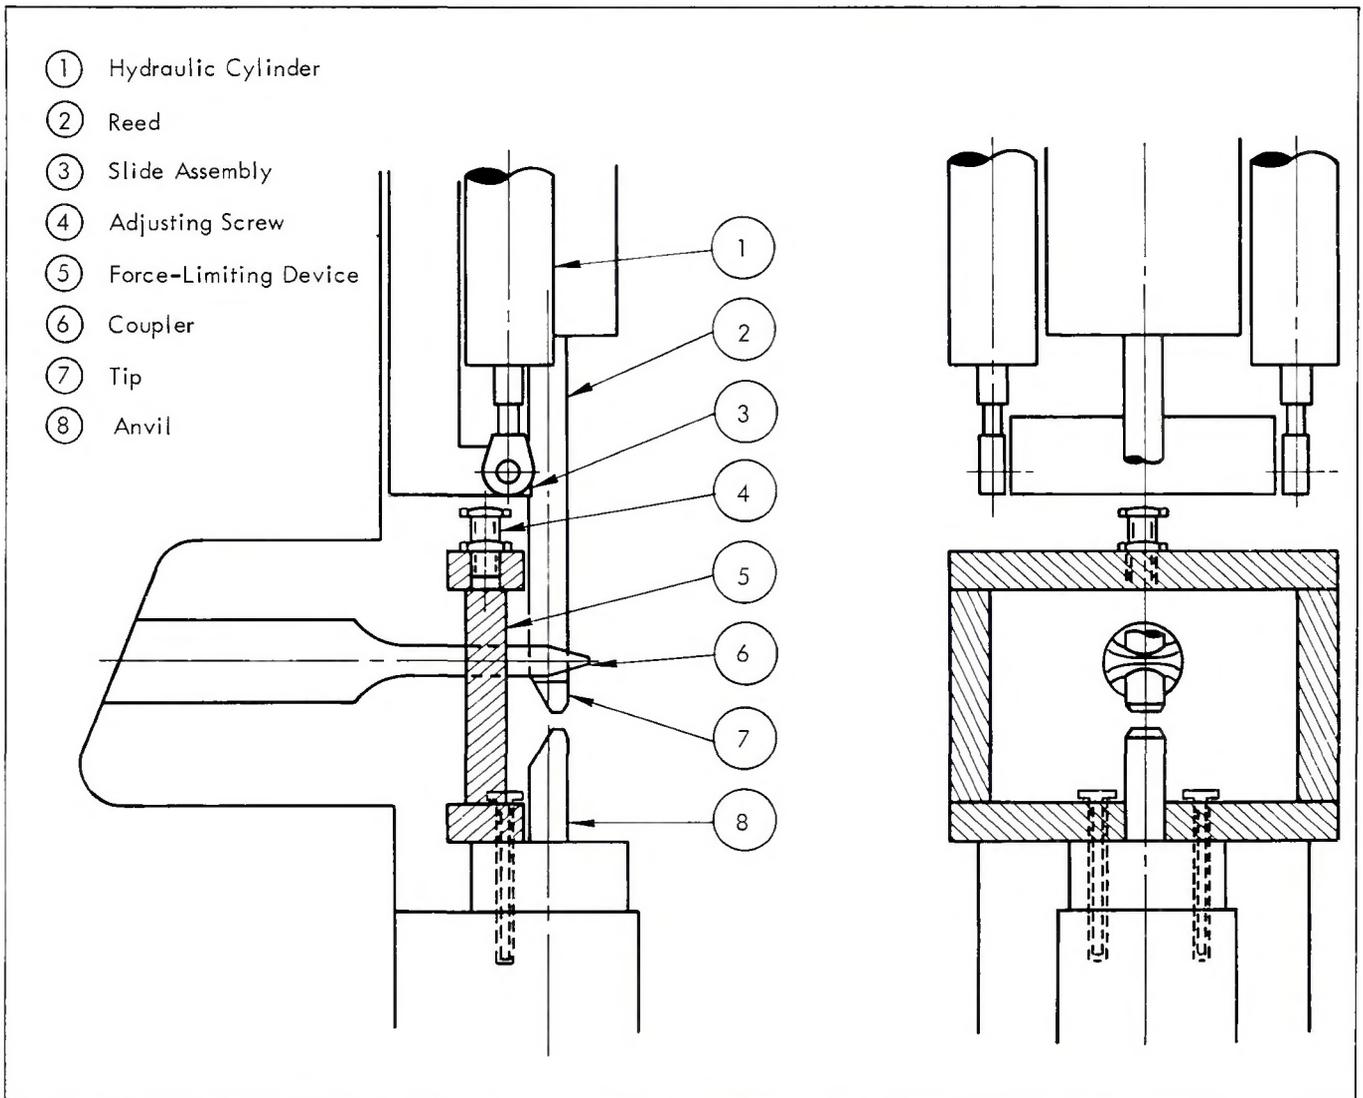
Force-limiting device and its relationship to the moving parts of the welding machine
